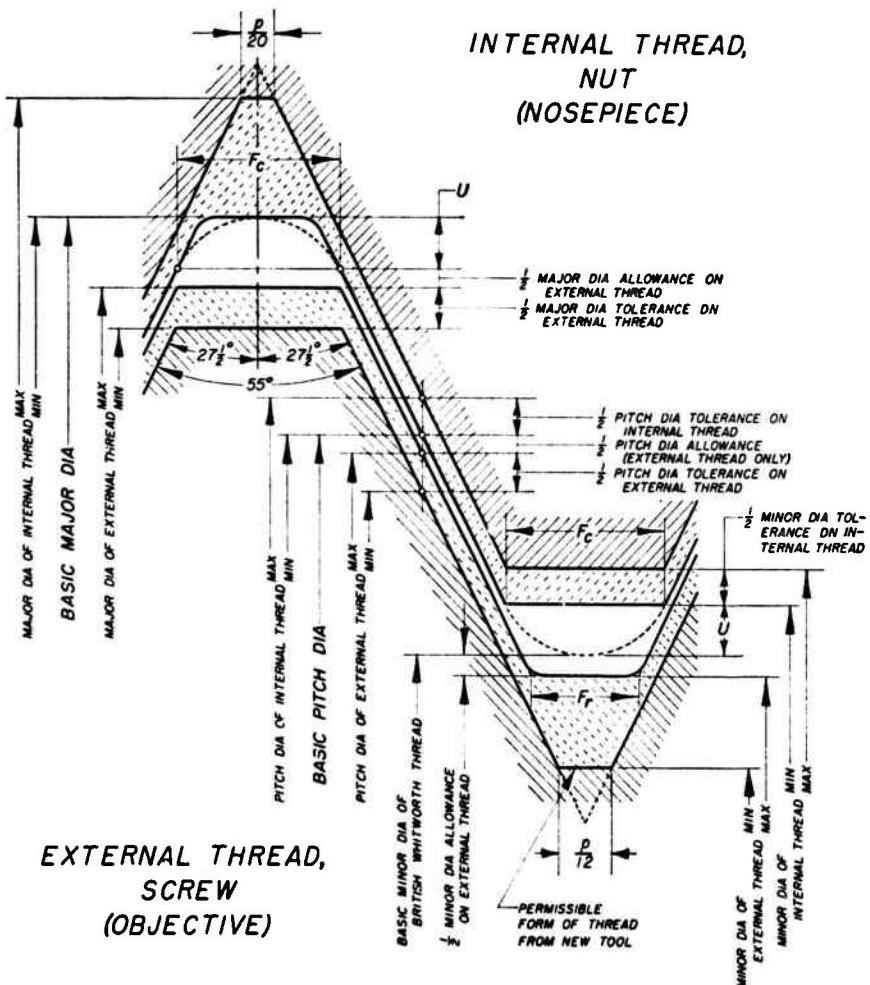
Disposition of tolerances, allowances, and crest clearances for 0.800—36AMO thread.
